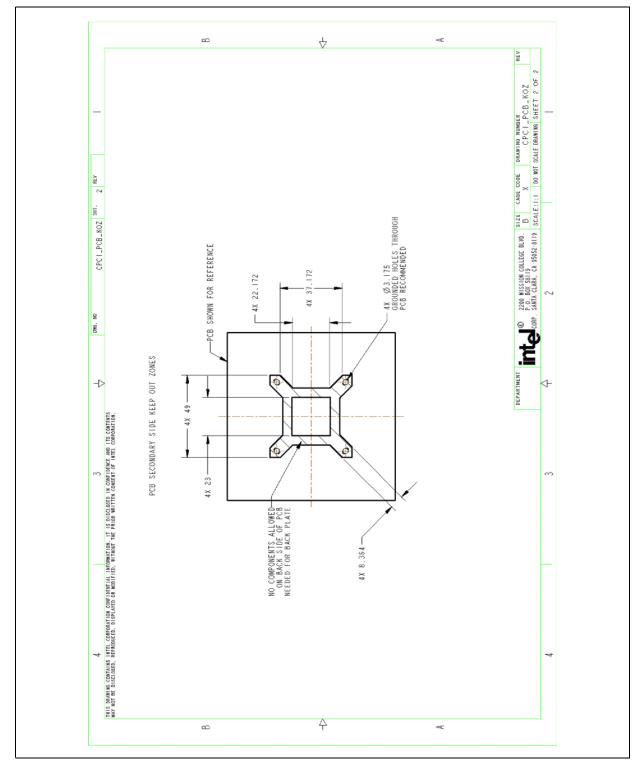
CompactPCI * Reference Heatsink PCB Keep Out Zone Requirements (Sheet 2 of 2)
